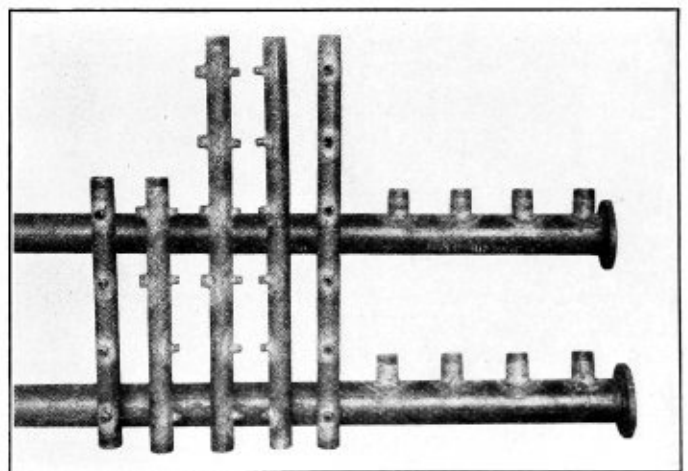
Welded Headers or Manifolds. The Two Larger Headers are 6-Inch Pipe with 3-Inch Nipples; the Smaller Ones are 3-Inch Pipe with 1- and 1 1/2-Inch Nipples. In all ten of these manifolds were welded
